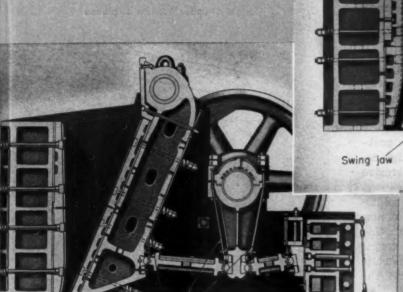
Below—Cross-section of a jaw crusher having toggle ends and bearings of type patented in 1880. Oil lines deliver lubricant to bearings
